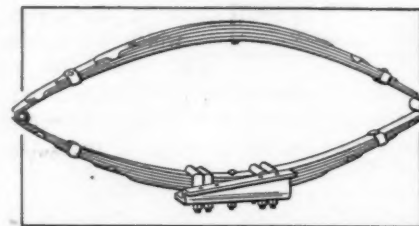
Full elliptic spring which is used at the front and rear in the suspension of the chassis
